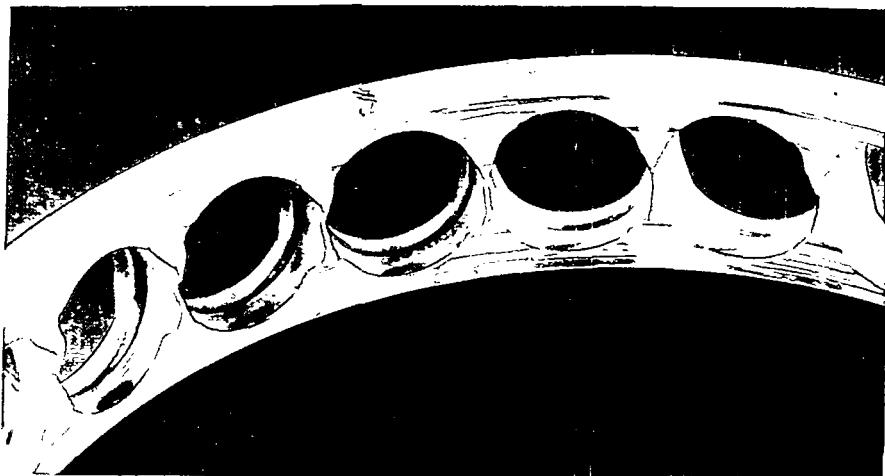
Appearance of Typical Cage Surfaces – Solid-Ball Bearing S/N 2560A-1
